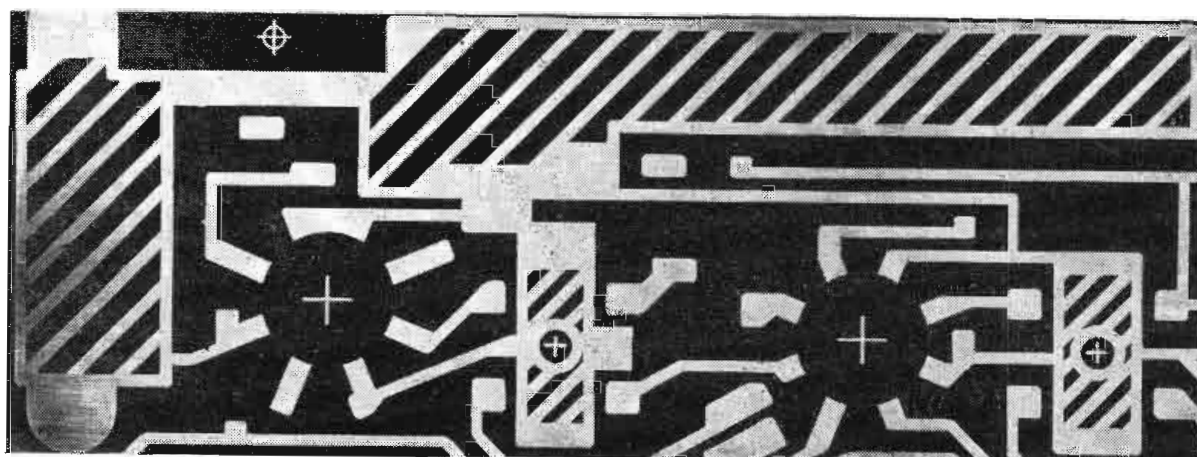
Hot solder coated chassis provides soldering aid finish to eliminate oxide removing bath
